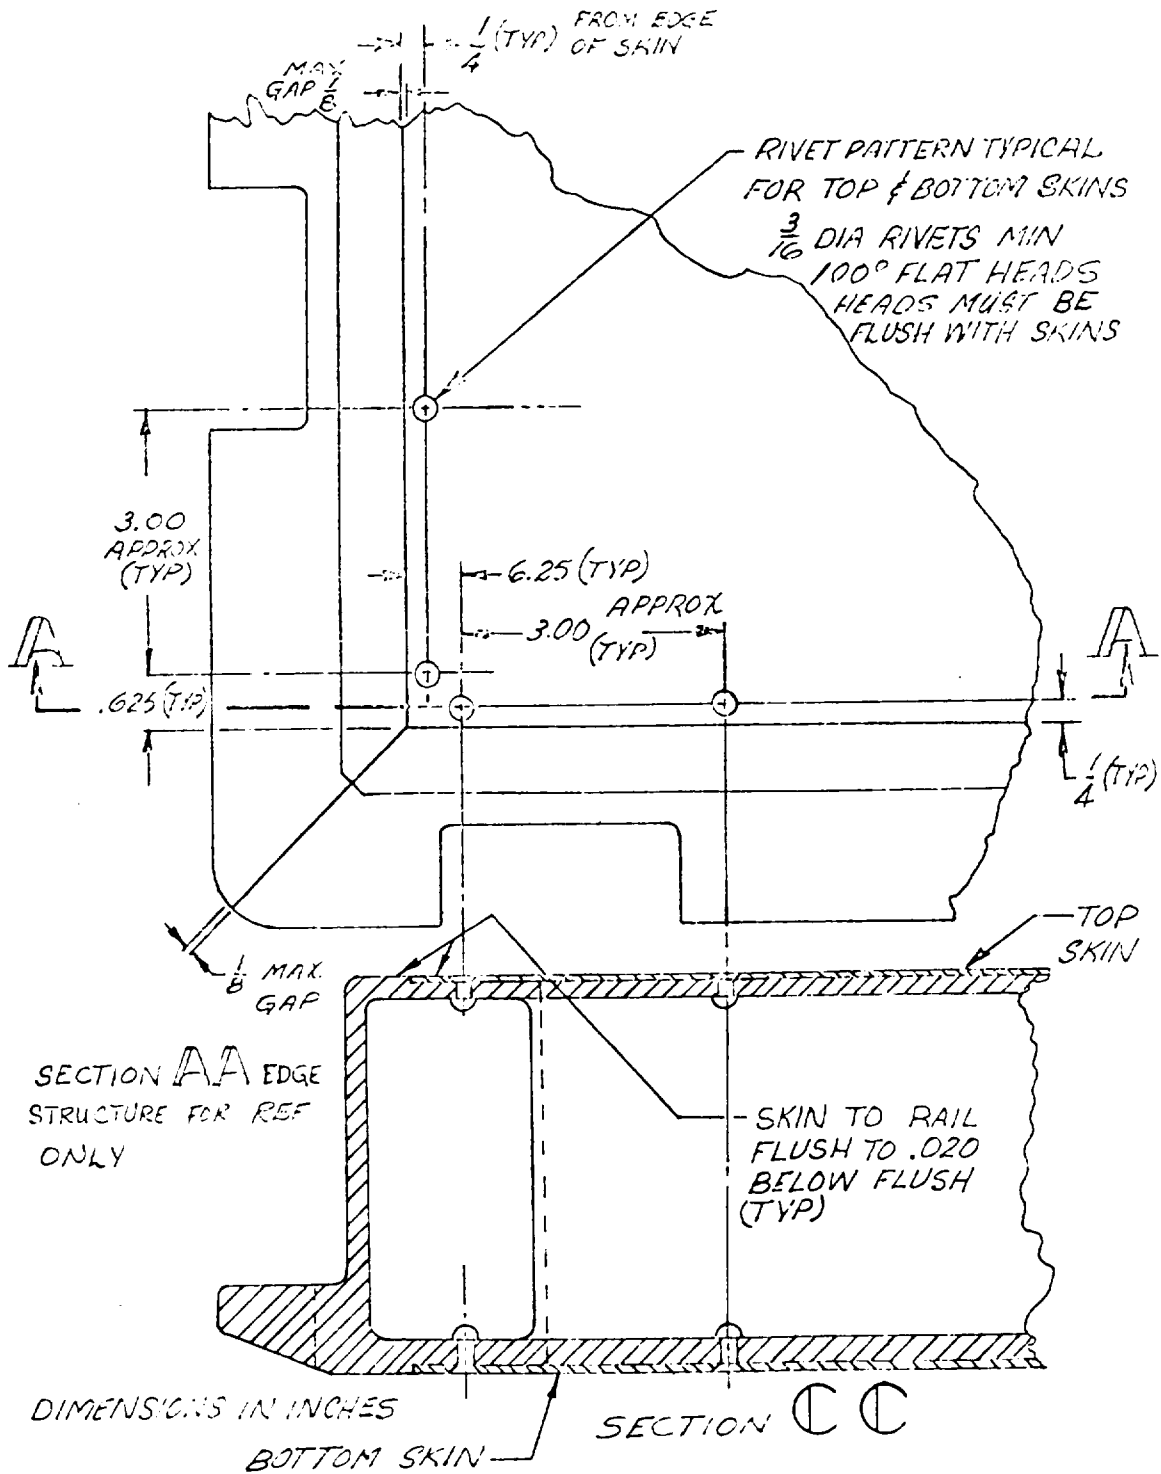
TYPICAL CORNER DETAIL & SKIN RIVET PATTERN FOR TYPE III PALLET
